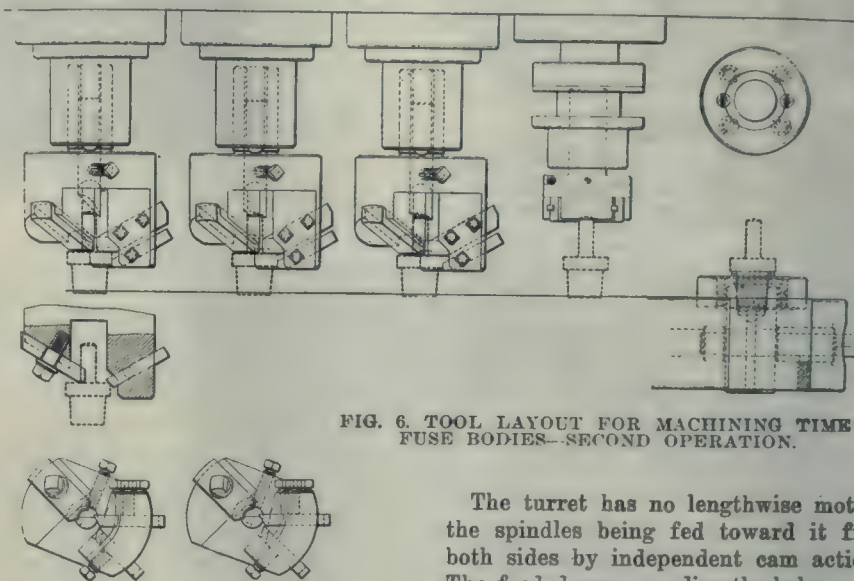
TOOL LAYOUT FOR MACHINING TIME FUSE BODIES—SECOND OPERATION.
